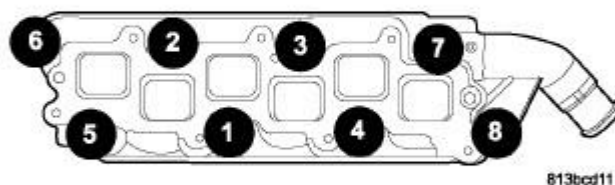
LOWER INTAKE MANIFOLD TIGHTENING SEQUENCE
